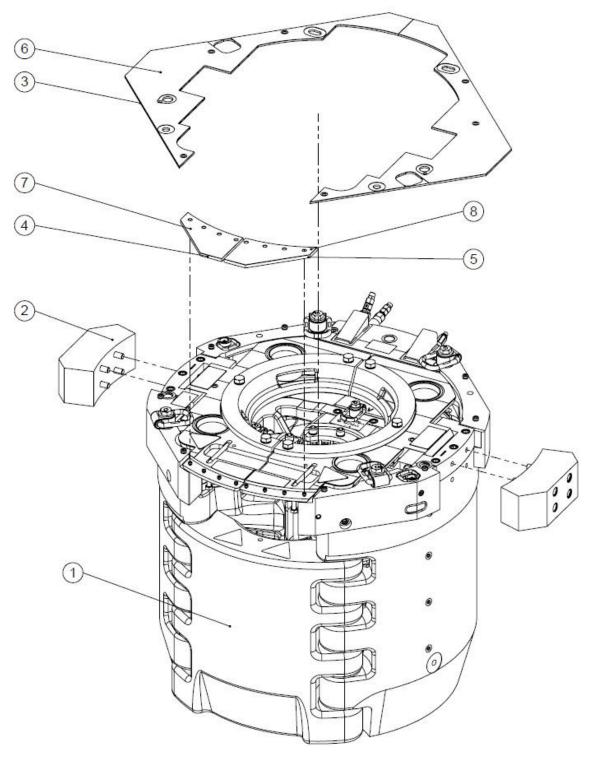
Principle drawing of a FMS 500 for Wirth Rotary Table
